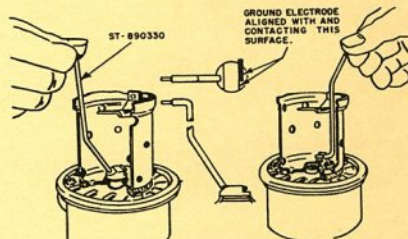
CHECK PLUG ALIGNMENT AND GAP
